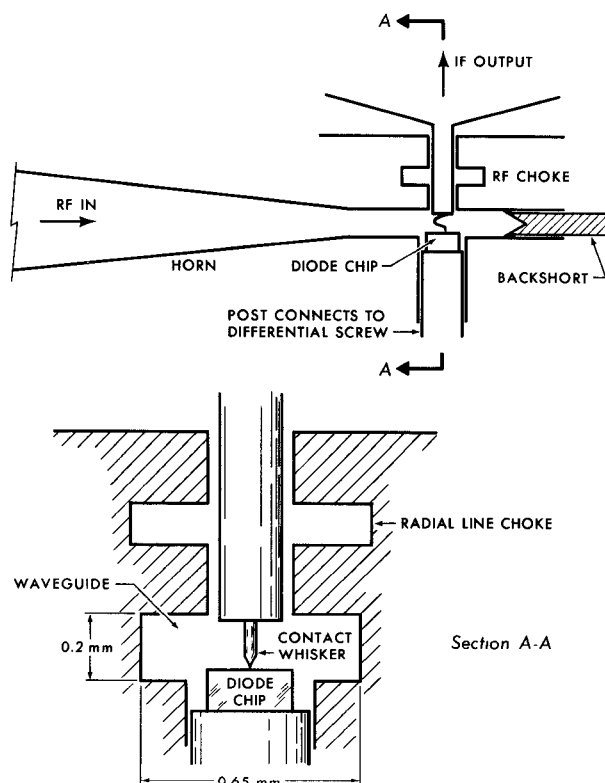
Side view and cross section of the 0.9 mm mixer.
